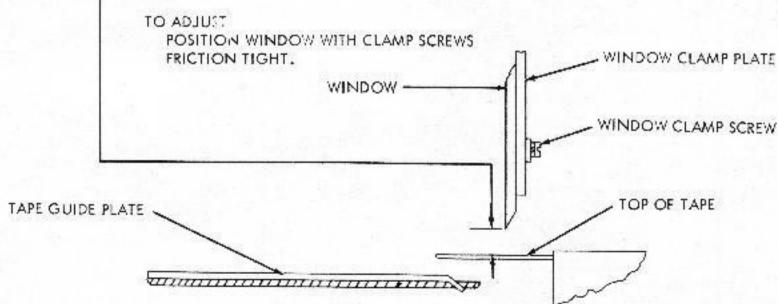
MODEL 28 TAPE PRINTER COVER
